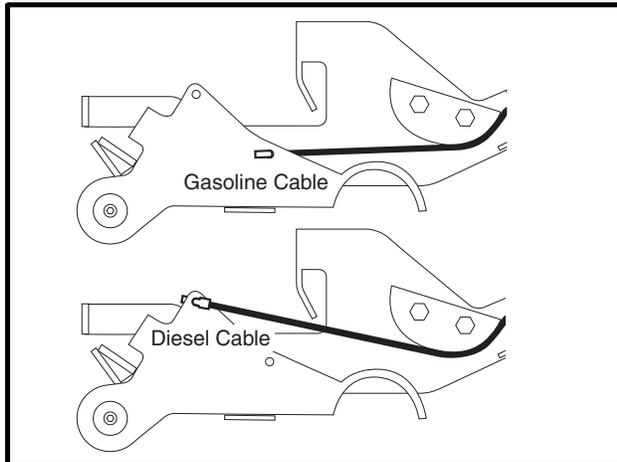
22 Z-Shaped Cable End in Hole at Pedal
